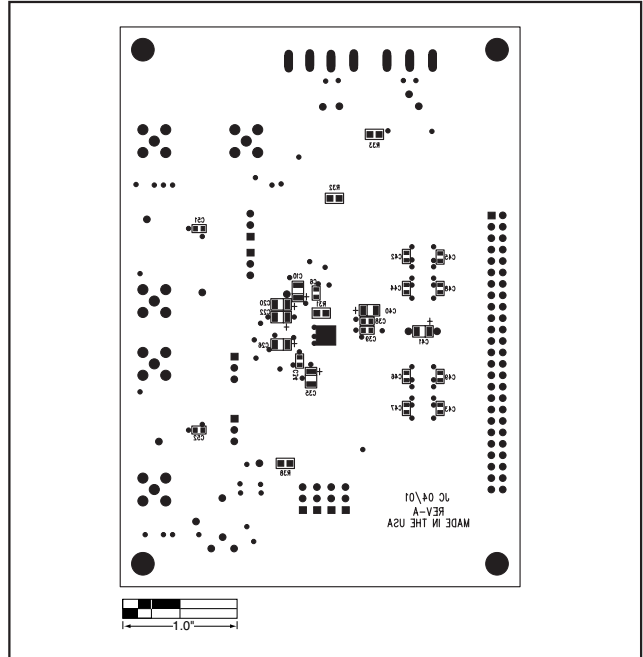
MAX1181 EV Kit Component Placement Guide—Solder Side
